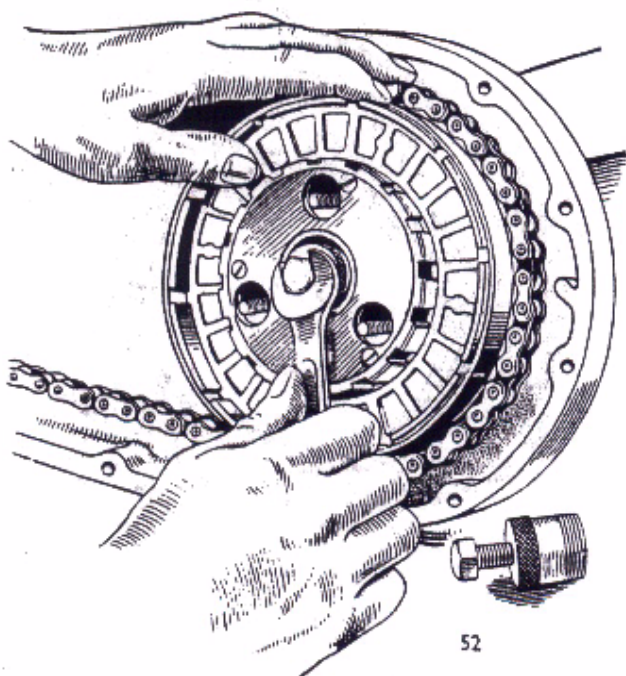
Extracting the clutch centre, using extractor DA 50/1 and locking plate Z13
